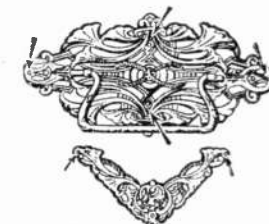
Where the parts should be fixed to hold the metal ornaments.
